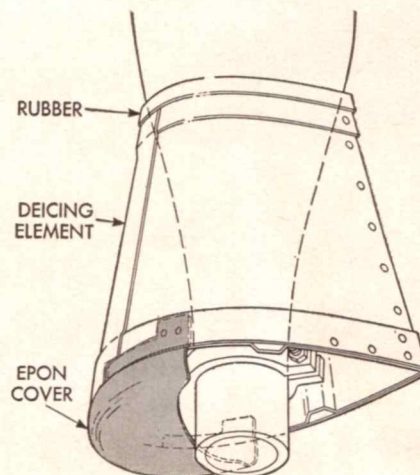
Sketch of propeller cuff, showing location of leading edge cover plate.
